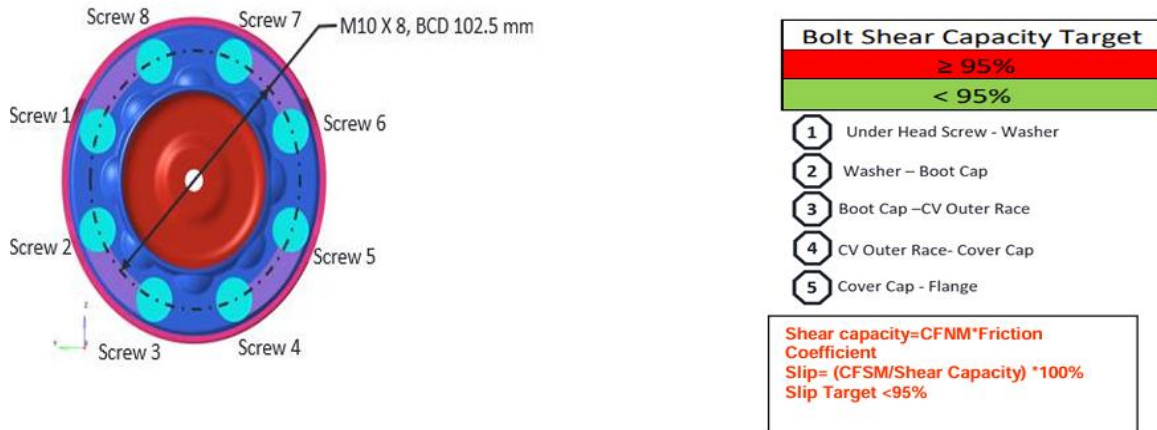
Bolt Shear Capacity and Interface Slip Assessment for the Rear Driveshaft Flange Assembly
